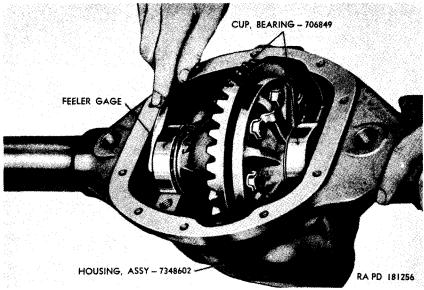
Checking clearance between front axle differential bearing cup and housing.
